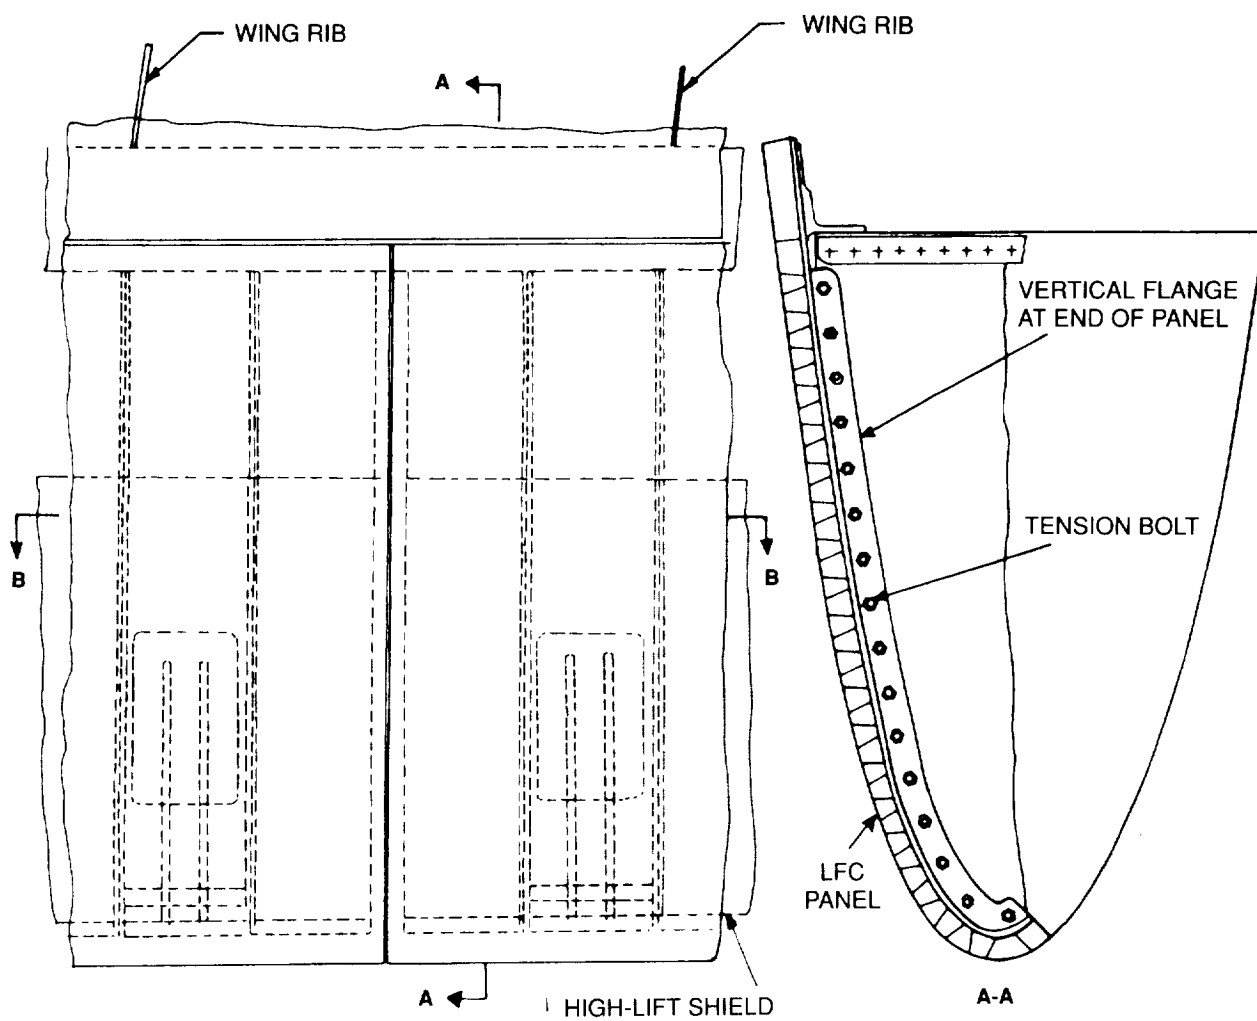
WING LEADING EDGE WITH MODIFIED THREE-RIB JOINT
